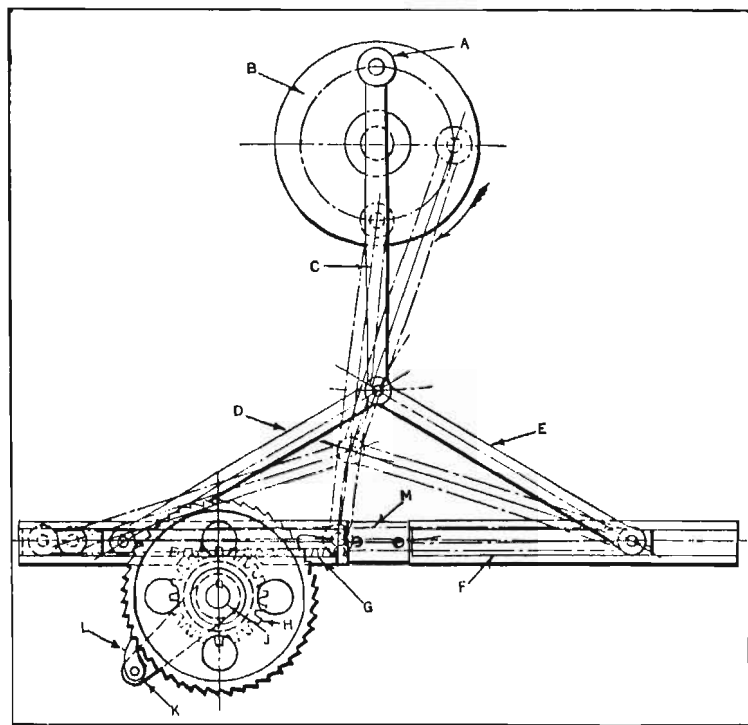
Ratchet Feed Mechanism which may be Adjusted without Stopping the Machine or Driving Crank
